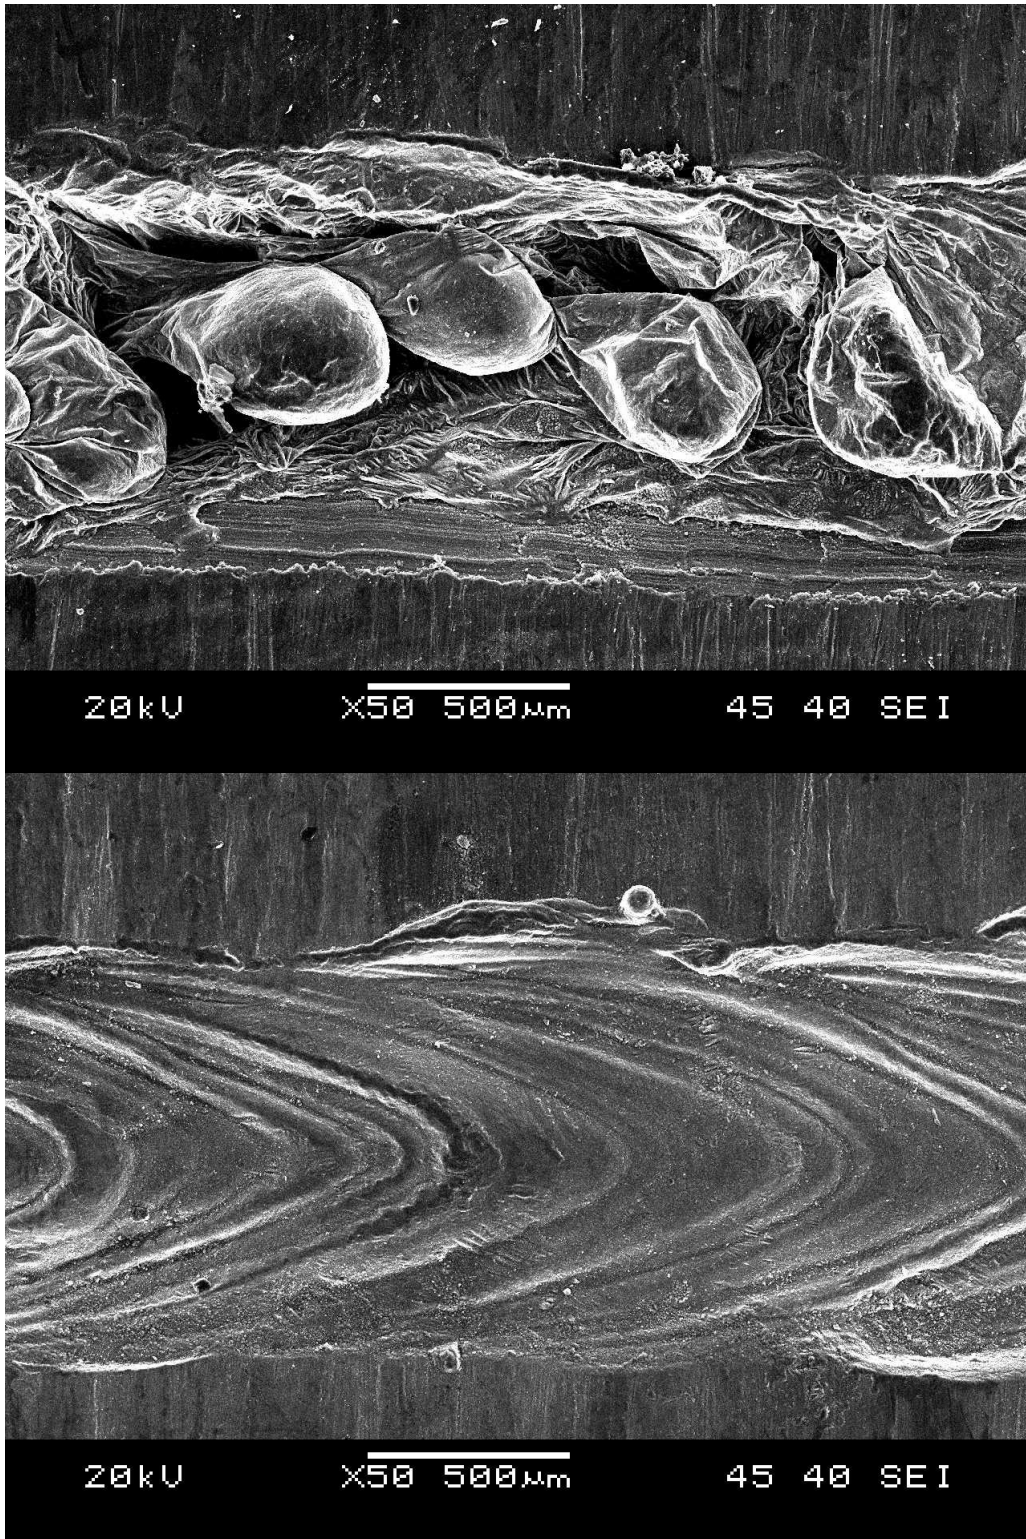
Fibre laser weld made at 5 kW and 150 mm/s: a) top and b) bottom weld bead surfaces.
